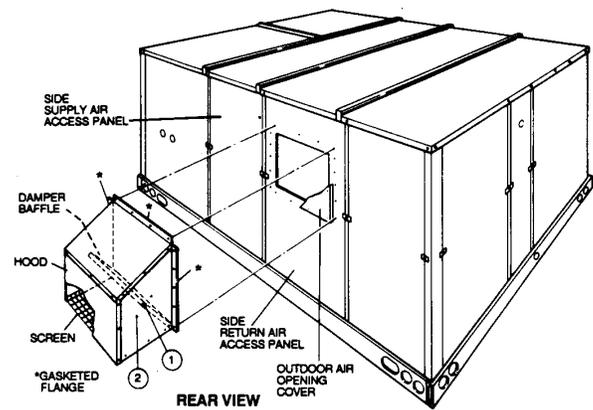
FIXED OUTDOOR AIR DAMPER
